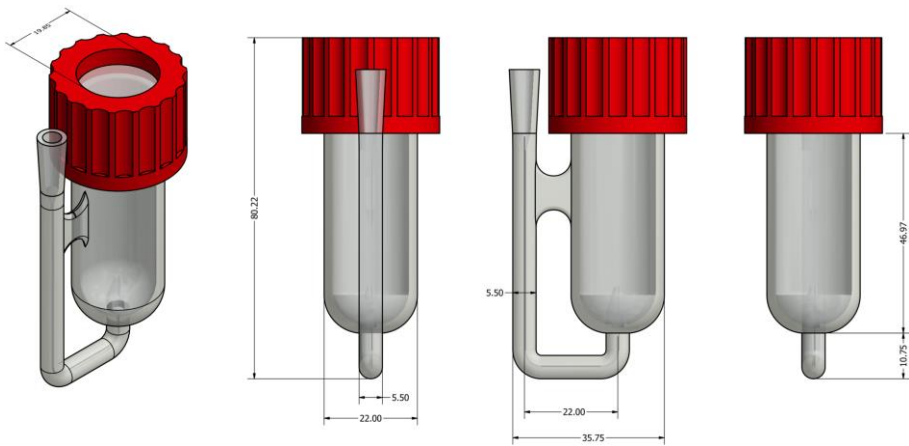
CAD views of the all-glass detection cell. Dimensions are in mm.
